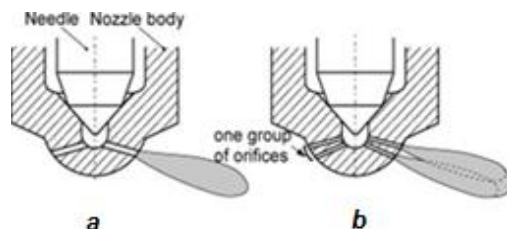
Types of diesel injector nozzles: a) single hole nozzle, b) micro hole nozzle
